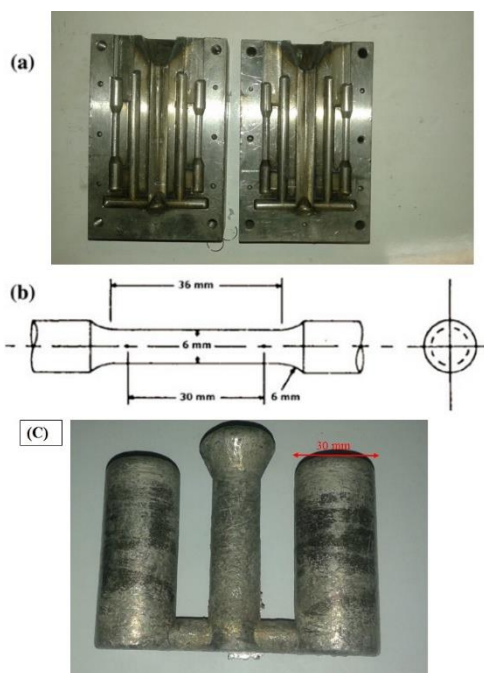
a) Cast iron mold, b) tensile sample dimensions, (C) Cast iron mold for extrusion
